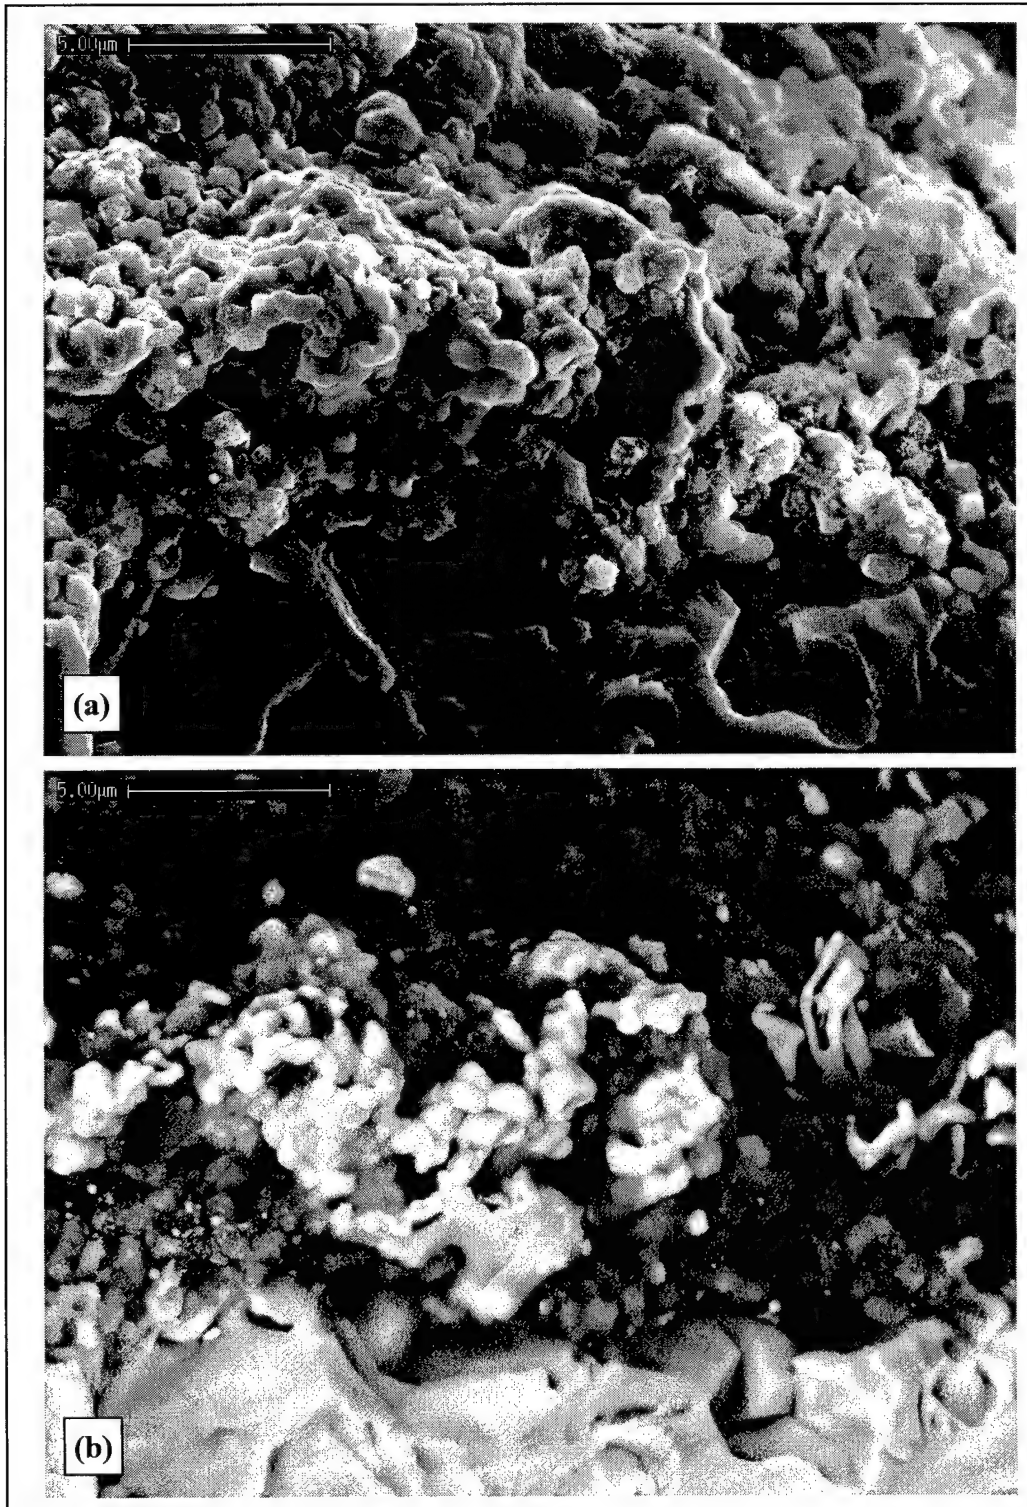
Close-up of the magnesium-titanium transition region on the Specimen B2 fracture surface flaw under (a) SEM and (b) RBS.
